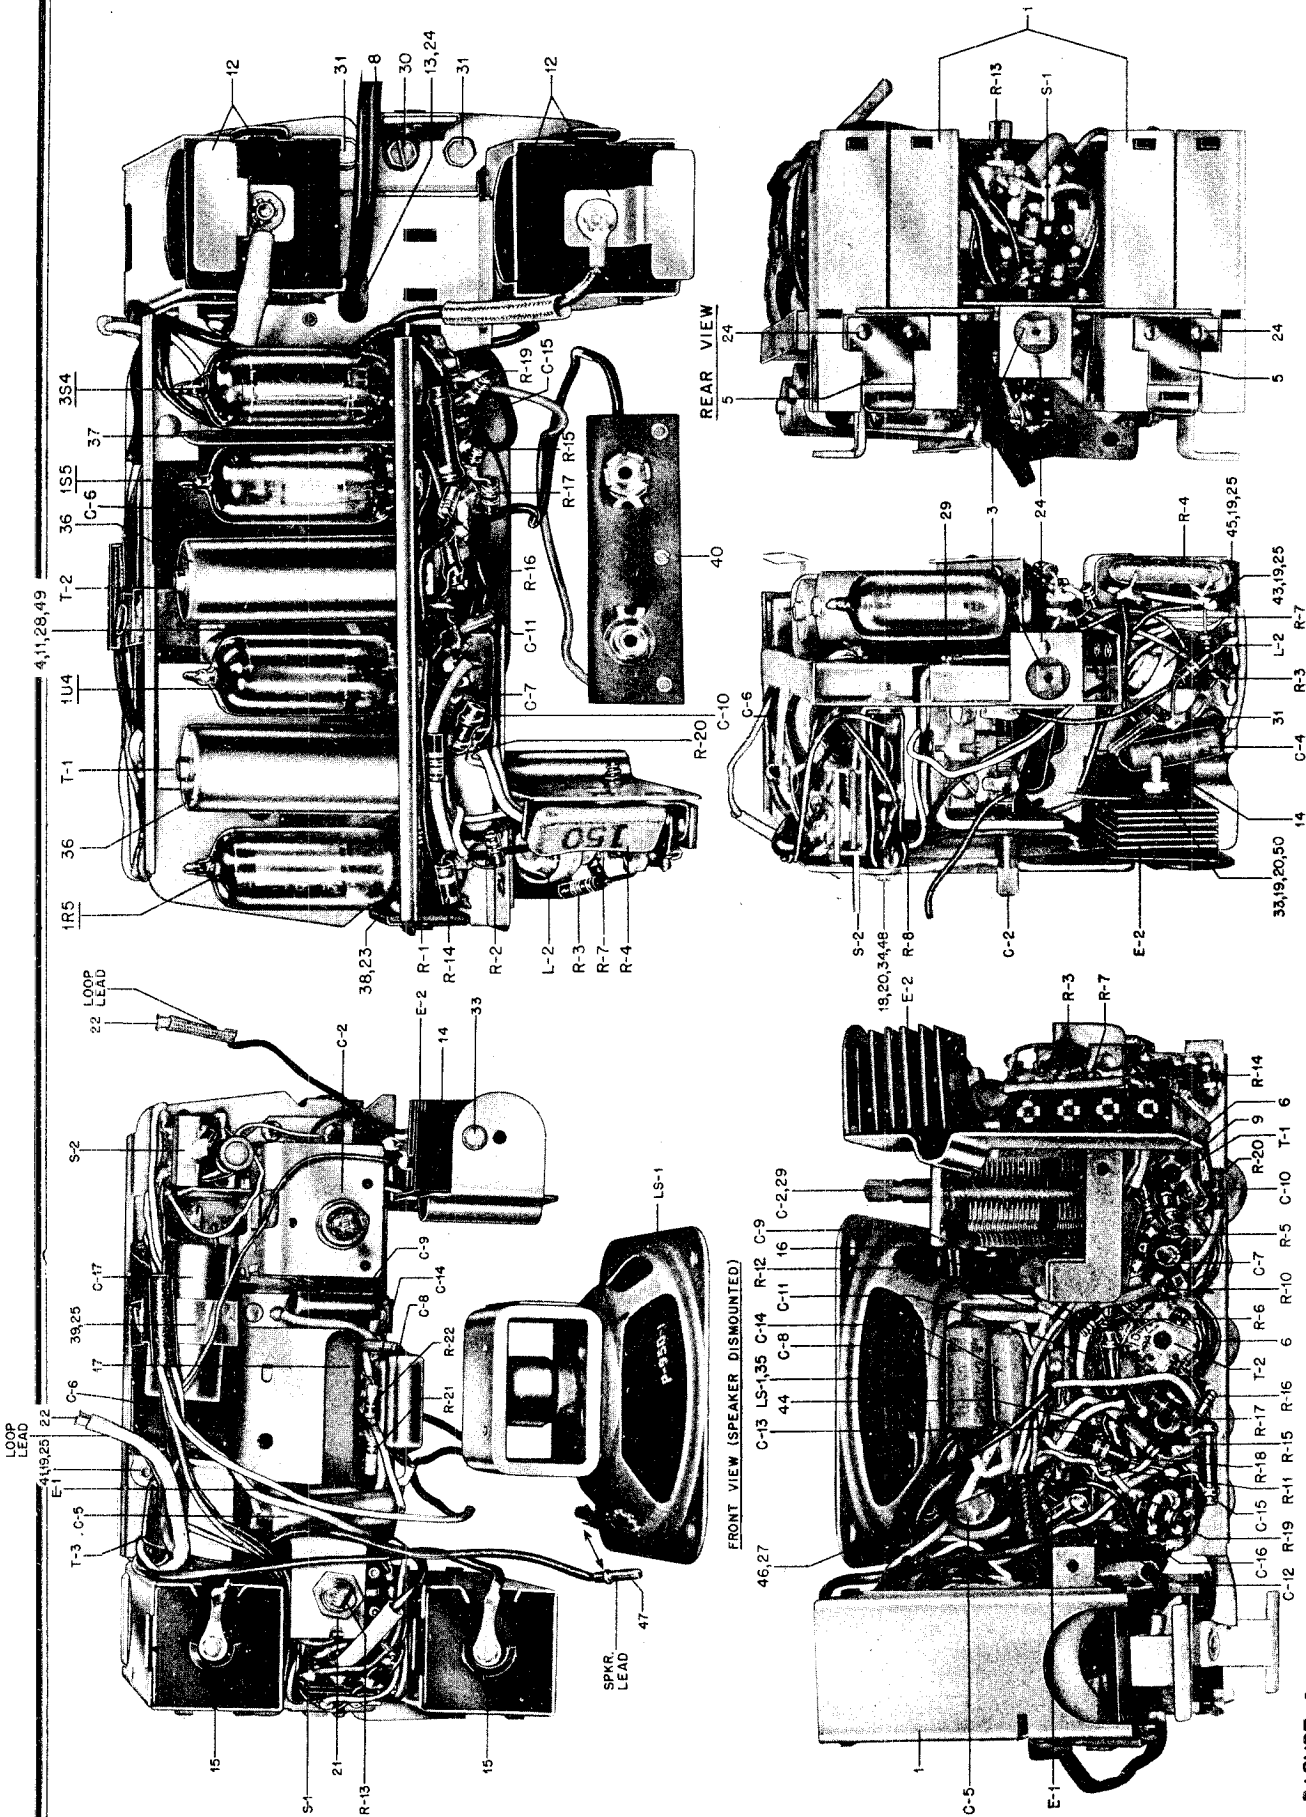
CHASSIS HS-62A PARTS LOCATIONS - FRONT & BOTTOM VIEWS
